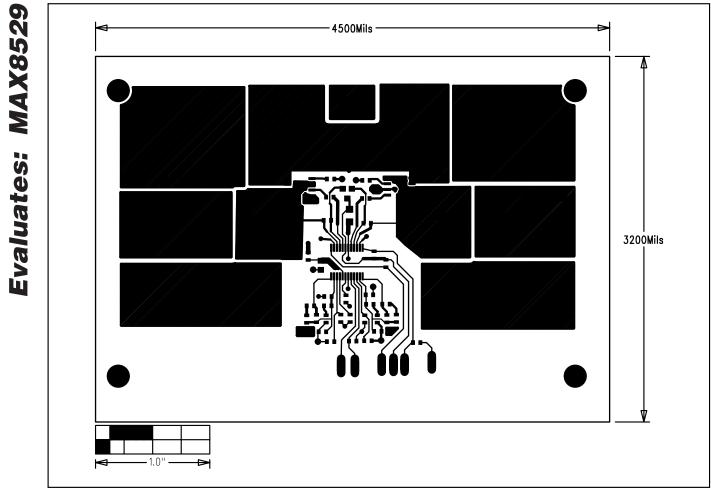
MAX8529 EV Kit PC Board Layout—Component Side
